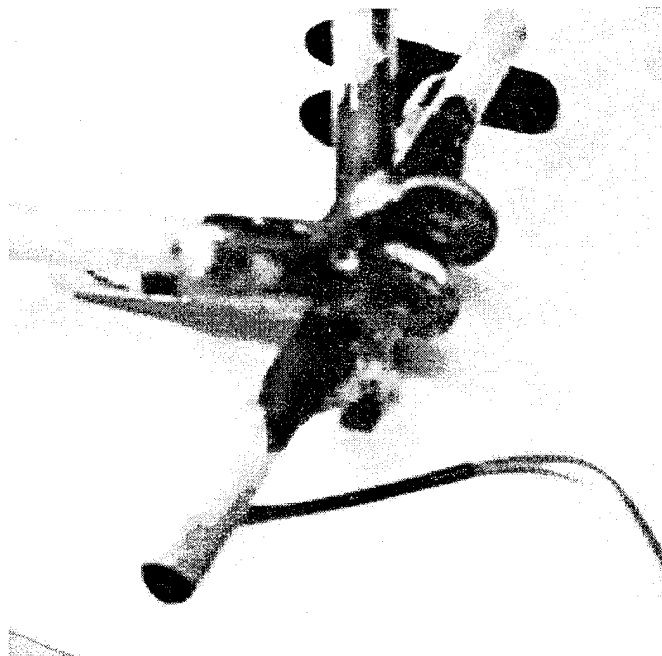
SAMPLE 3 - BLIND SAMPLE USED TO DEVELOP THE INSPECTION TECHNIQUES.
